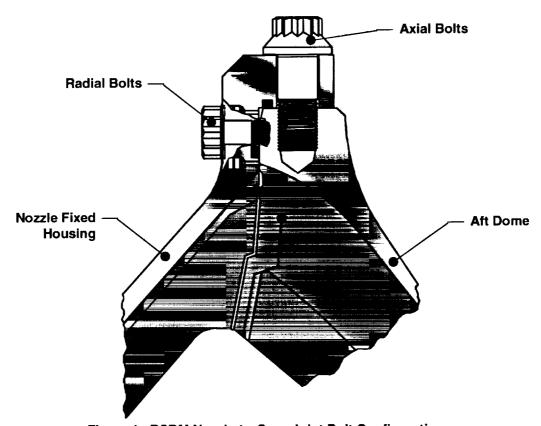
RSRM Nozzle-to-Case Joint Bolt Configuration
